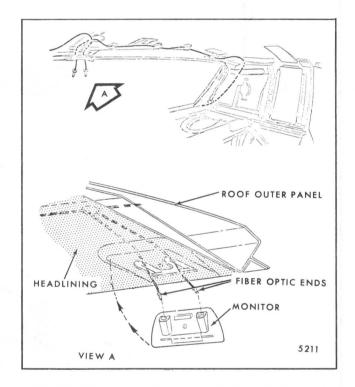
Fiber Optic Monitor Installation - Cadillac and Buick "C-E" Styles, Except "Cadillac "E-67" Style
